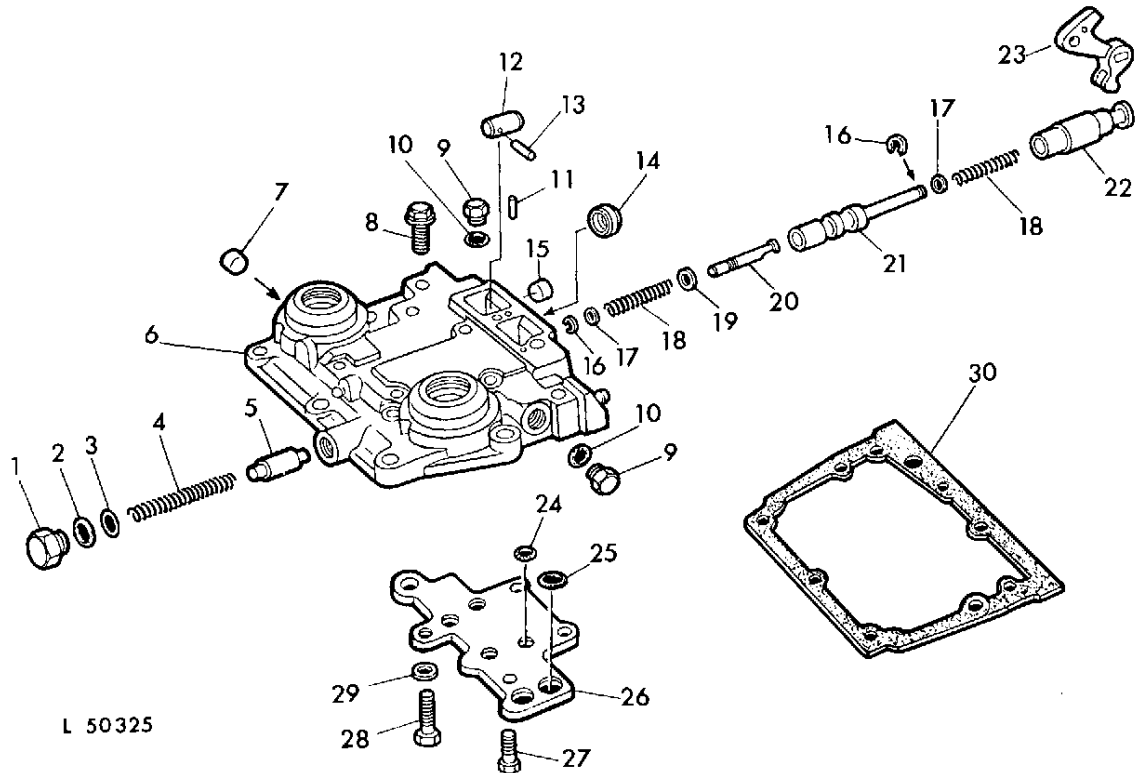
Control Valve Assembly and Pressure Regulating Valve, Exploded View
